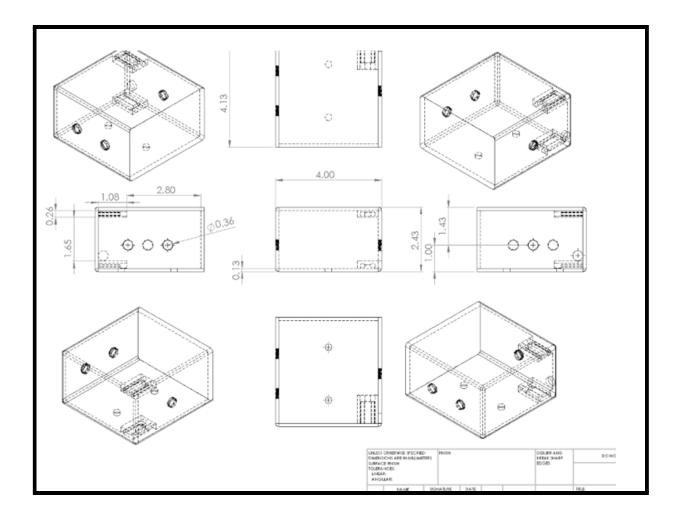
Part 11a. Brake Splitter Enclosure Drawing
